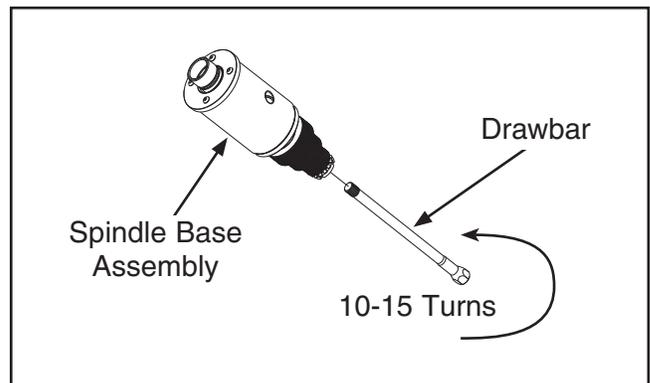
Inserting drawbar into place (spindle housing removed for clarity).
